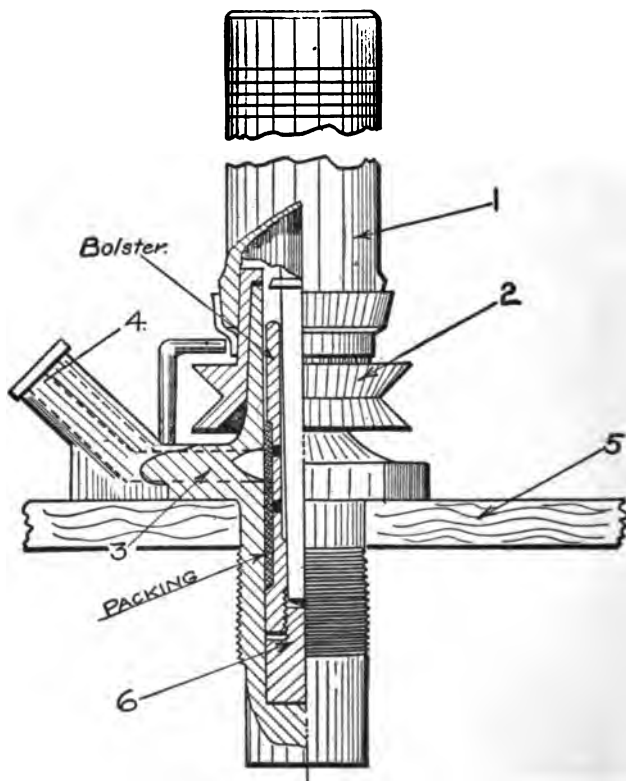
SEC. 10rr.—Sectional view of a spindle and oil chamber.
